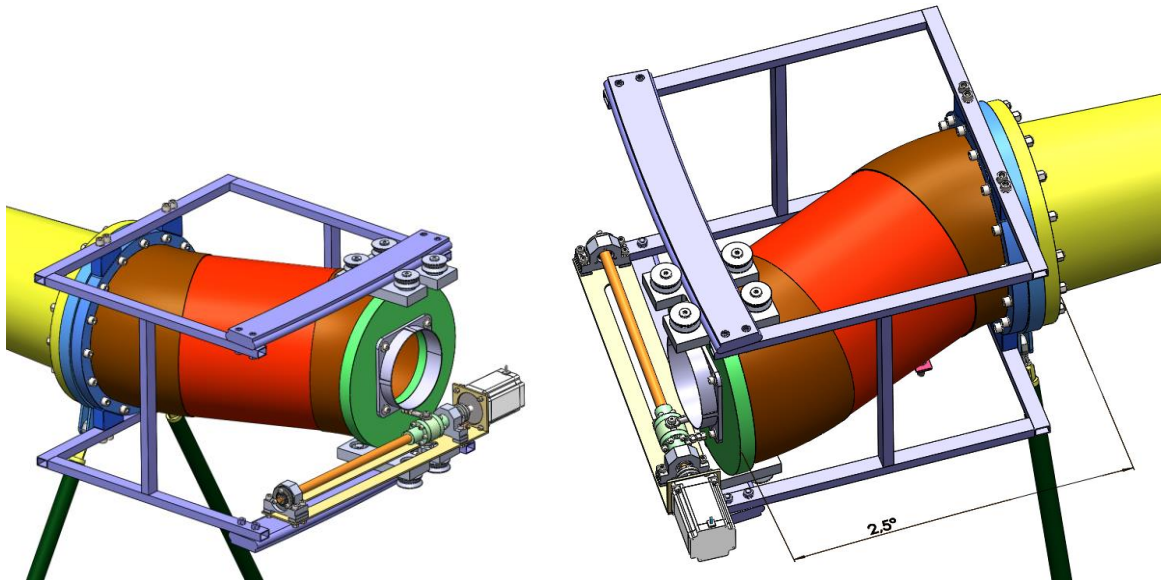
Deflected bellows weldment assembly in extreme position of other polarity
